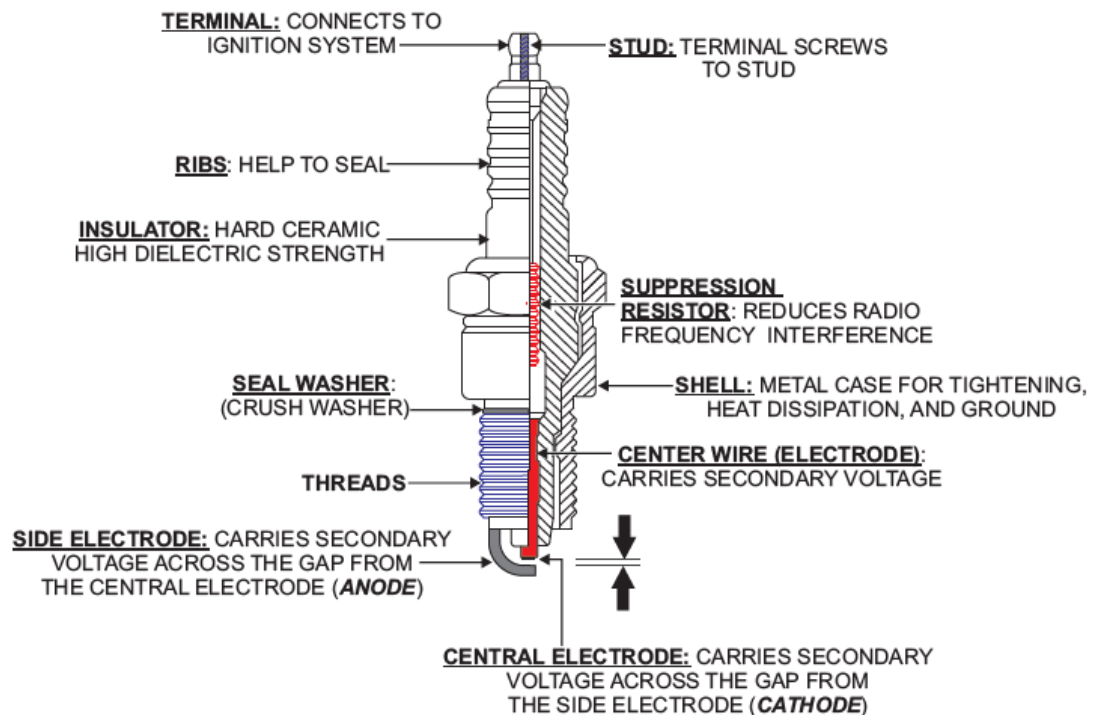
Cutaway drawing of conventional spark plug [16]
